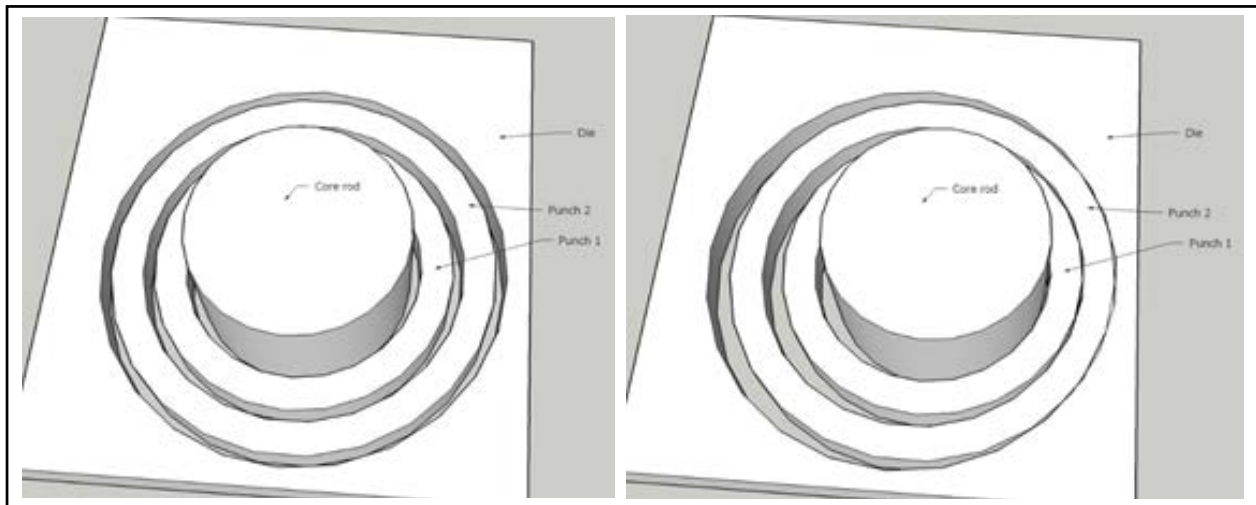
Left: simple tool with concentric part; right: clearances stacked in one direction.
